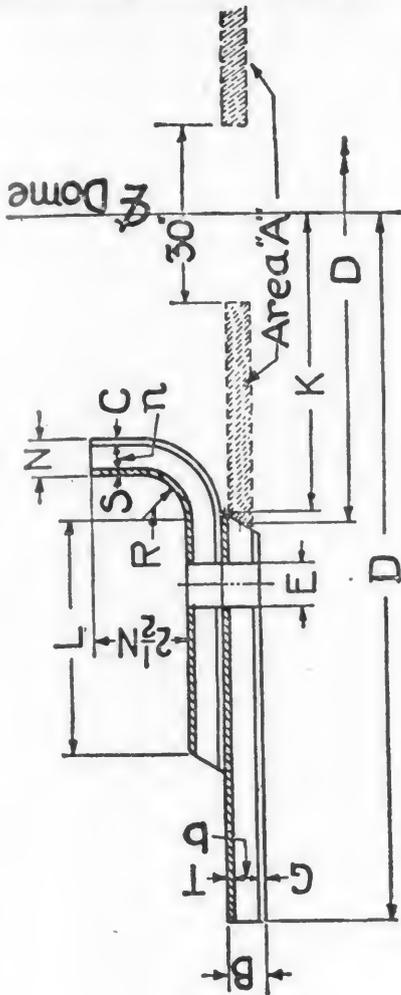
Single full-fillet lap joint with plug welds. Interior heads of compartment tank cars.
